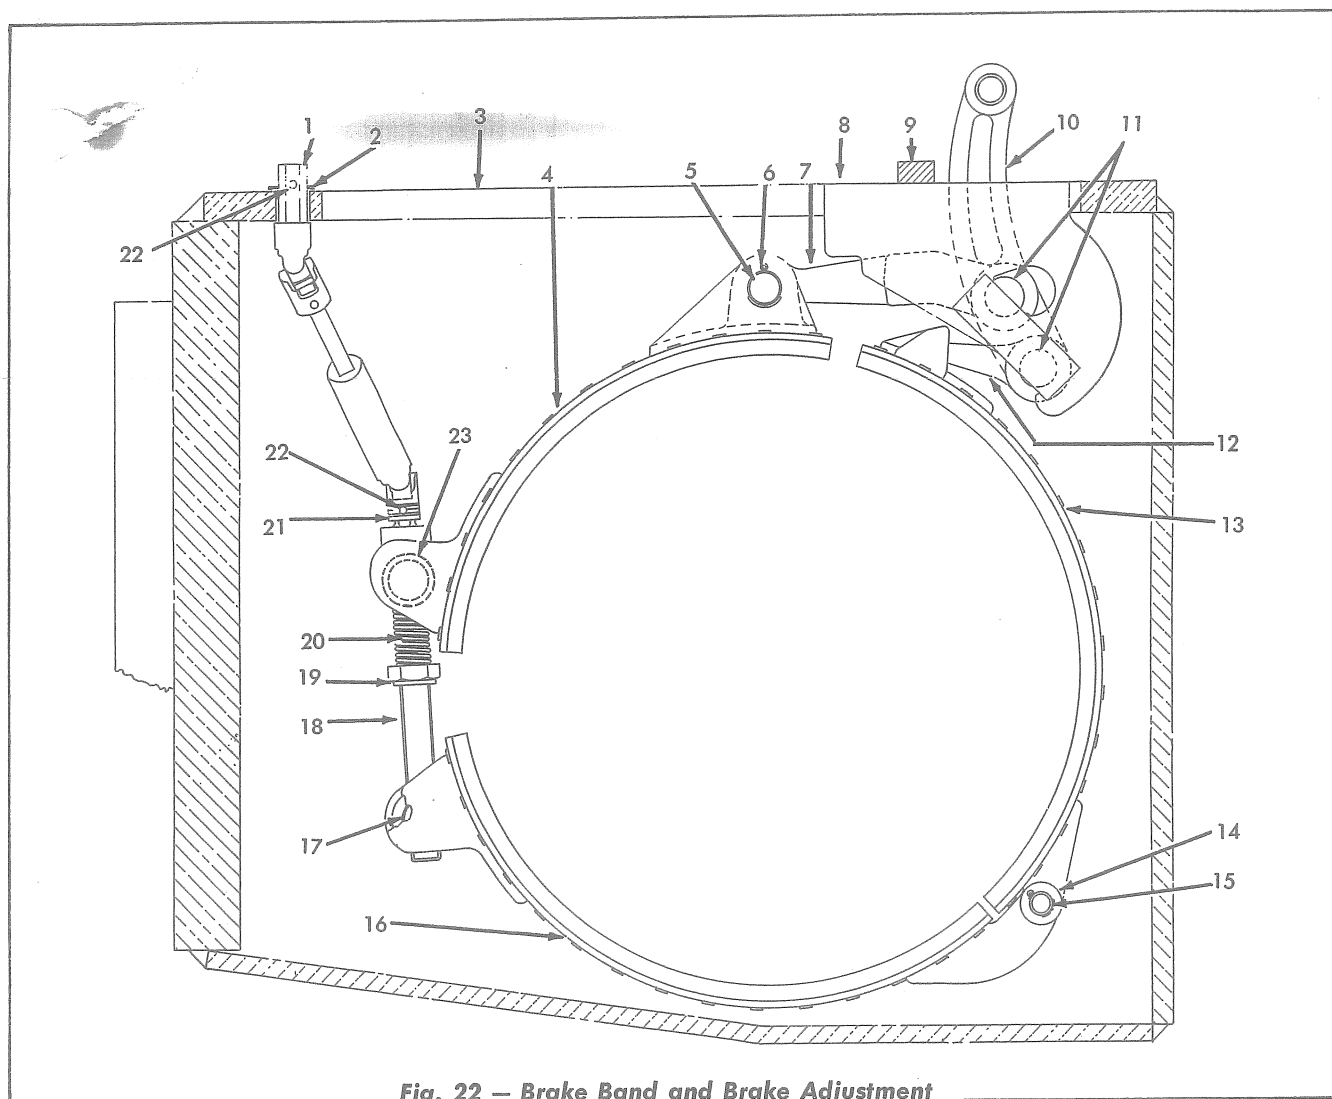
Brake Band and Brake Adjustment Assembly — Sectional View
